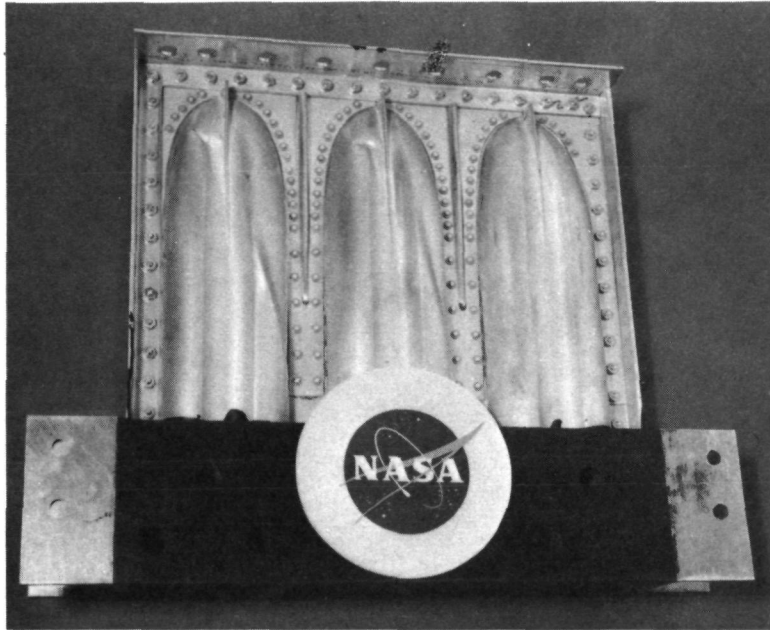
END CLOSURE SPECIMEN FAILED IN COMBINED AXIAL COMPRESSION AND SHEAR
